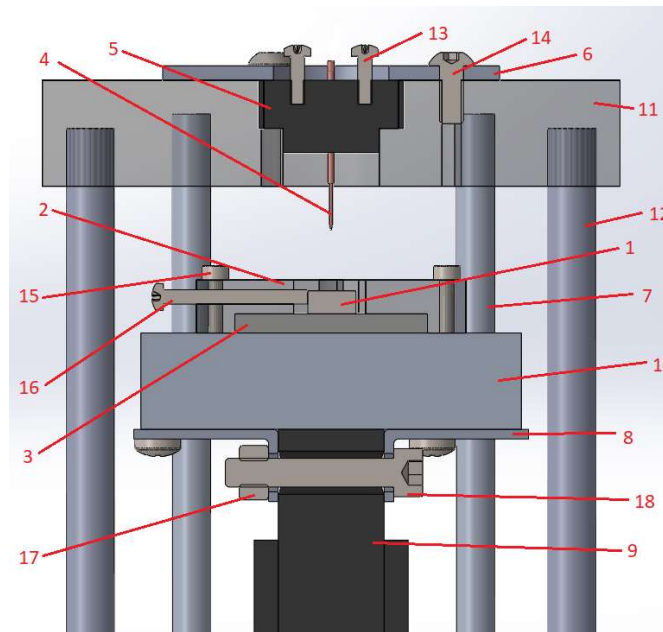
Electrical conductivity measurement setup cross section view: 1 – Sample; 2 – Sample holder; 3 – Peltier element; 4 – Test needles; 5 – Needle holder; 6 – Fixing element; 7 – Linear guides; 8 – Bracket; 9 – Linear motion drive; 10 – Cooling element; 11 – Top housing; 12 – Housing rod; 13 – ISO 7045 M3 x 10 bolt; 14 – ISO 7380 M5 x 12 bolt; 15 – ISO 4762 M3 x 25 bolt; 16 – ISO 7045 M3 x 30 bolt; 17 – ISO 4034 M6 nut; 18 – ISO 4762 M6 x 35 bolt.
